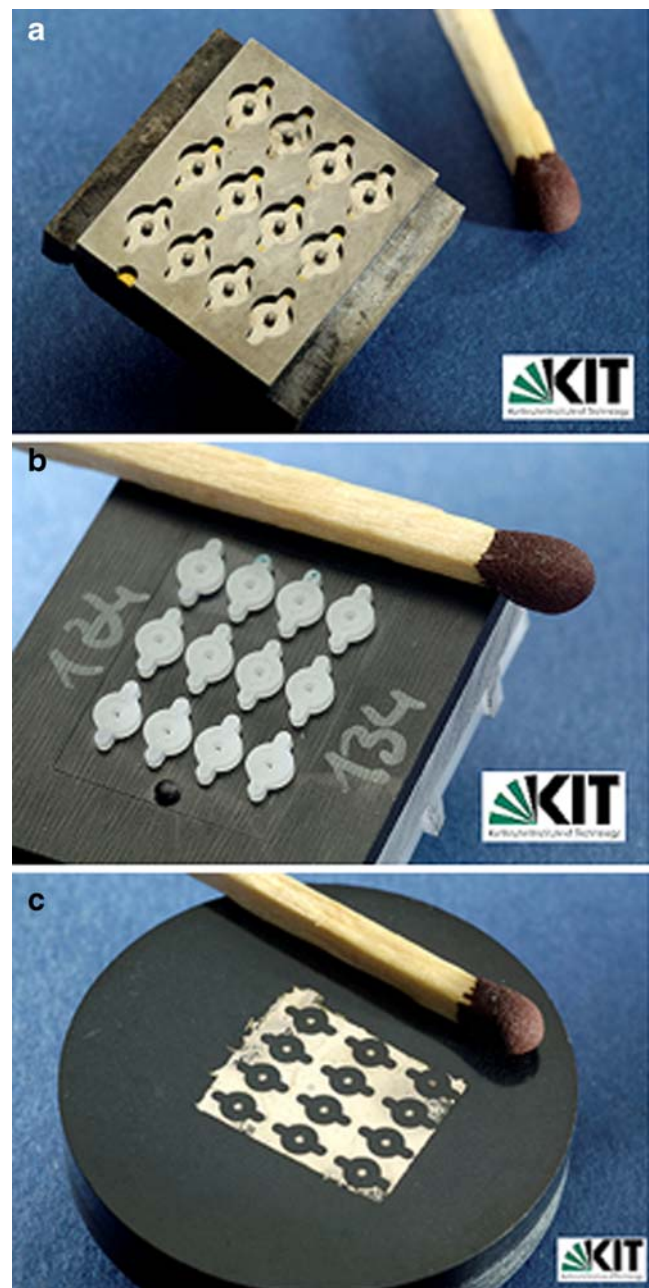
a–c The process chain explained by pictures: LIGA-made mould insert with 12 microgear wheel cavities (*top*), injection moulded two-component polymer substrate (*middle*), and final electroplated metal parts (*bottom*)
